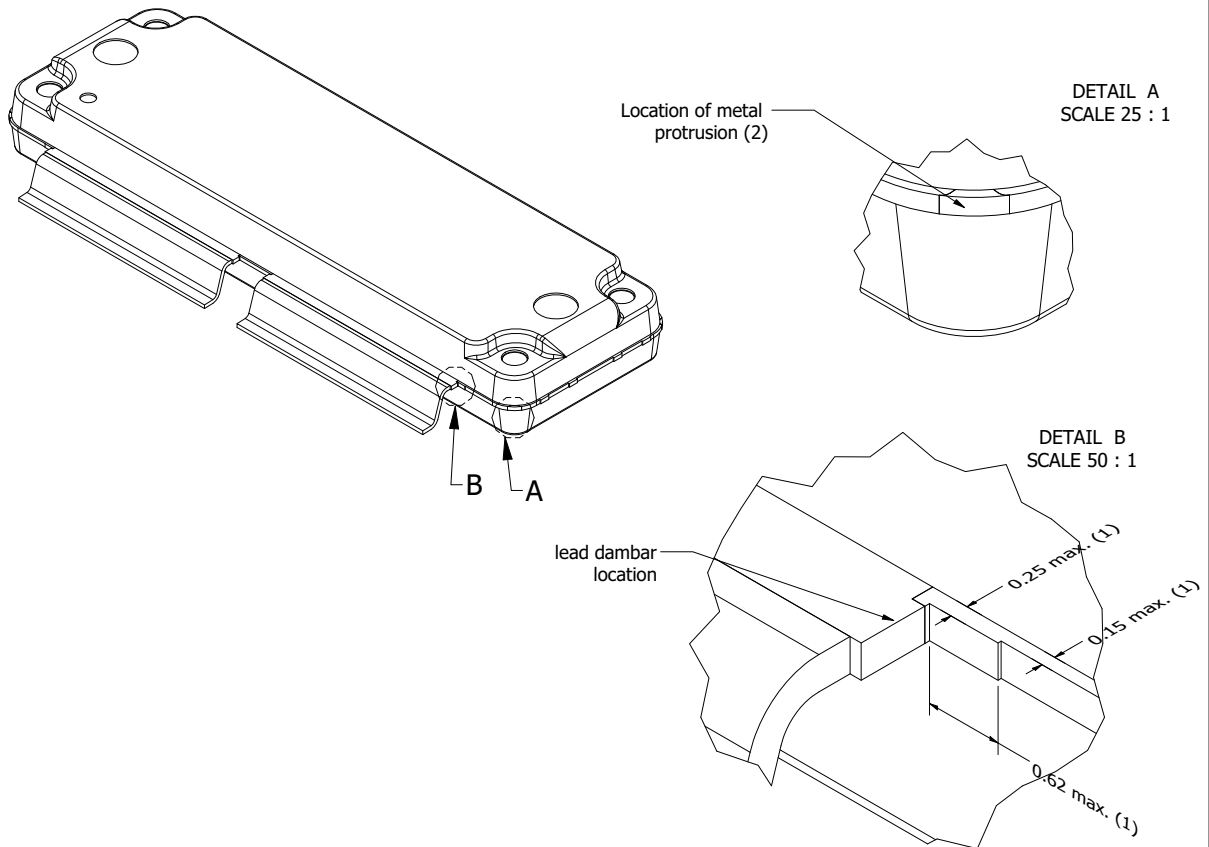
Package outline OMP-1230-4G-1 (sheet 1 of 2)
